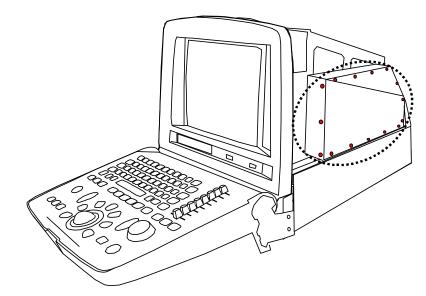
1-9. Screw holding the metal shield box covering the Single module
